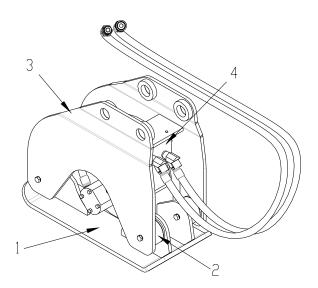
Major Subassemblies 1-Dynamic Assembly, 2-Suspension System, 3-Mounting Frame, 4-Control Valve
